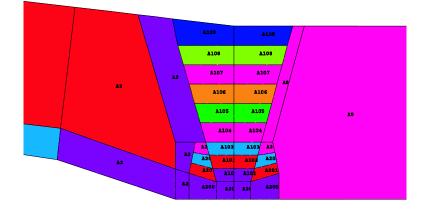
Pressurizer Surge Nozzle – Weld Passes Modeled
